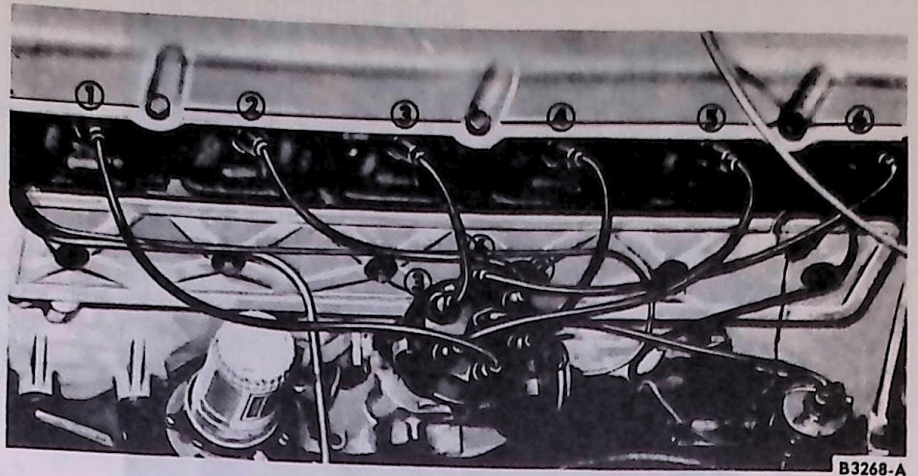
Typical Ignition Wiring—Six-Cylinder Engine
